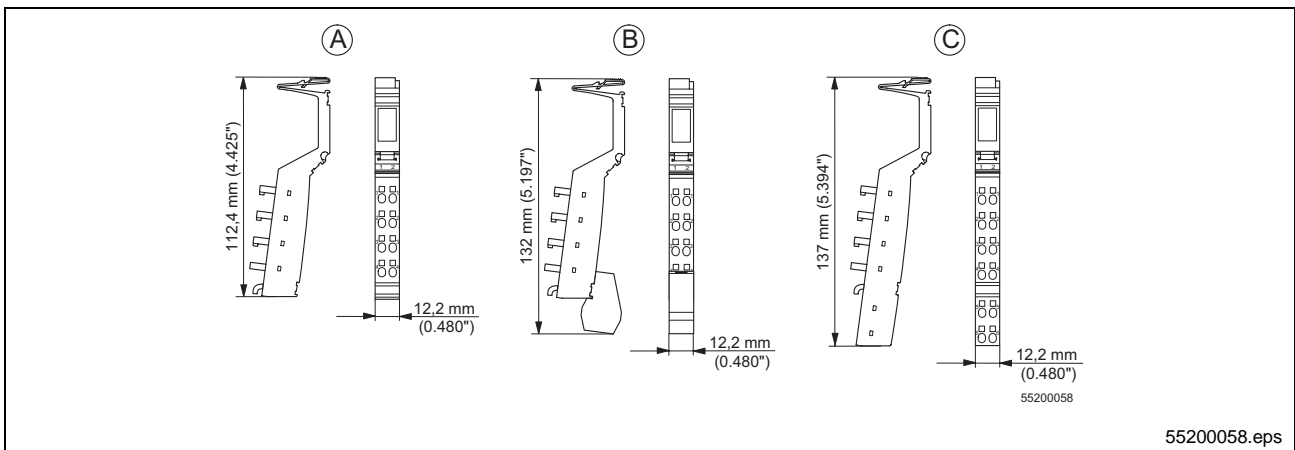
Dimensions of the electronic socket (8-slot housing)
